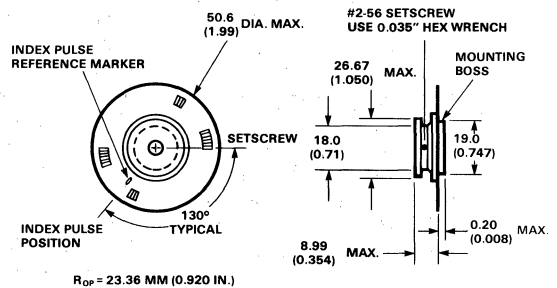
HEDS-6140 Codewheel Used with HEDS-9040.
